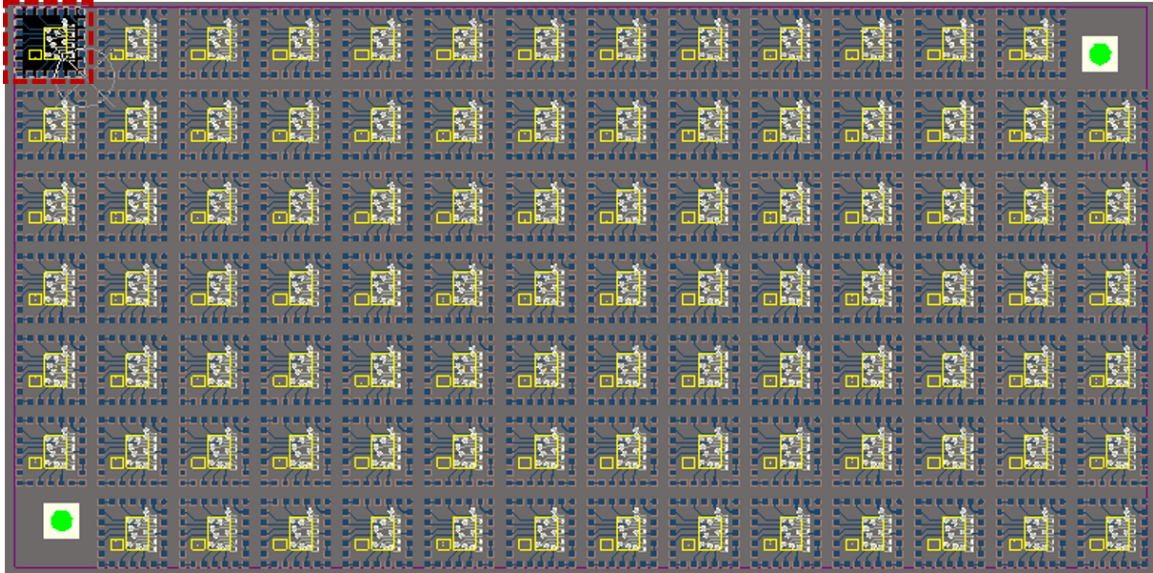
Large foil layout utilized for assembly of FlexLGA
